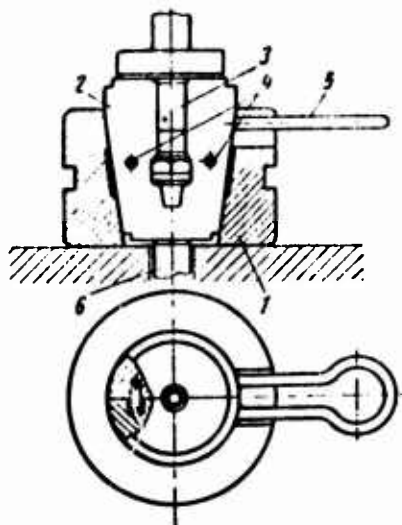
A closed die with split matrix for stamping on a screw friction press: 1 - casing; 2 - split die; 3 - punch; 4 - fixatives; 5 - handle; 6 - ejector.
